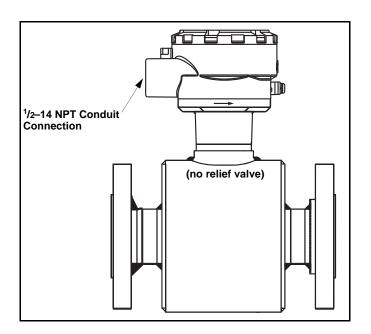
Standard Housing Configuration — Sealed Welded Housing (Option Code W0)
